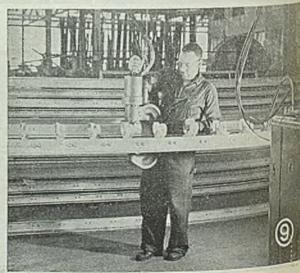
Closeup of jig in Fig. 6 showing speed clamps and work in flat position for assembling. Entire jig tilts 90 de grees right or left to permit downhand welding. Note her jig elements have been adjusted to produce truss with angle that fits pitch of roof
